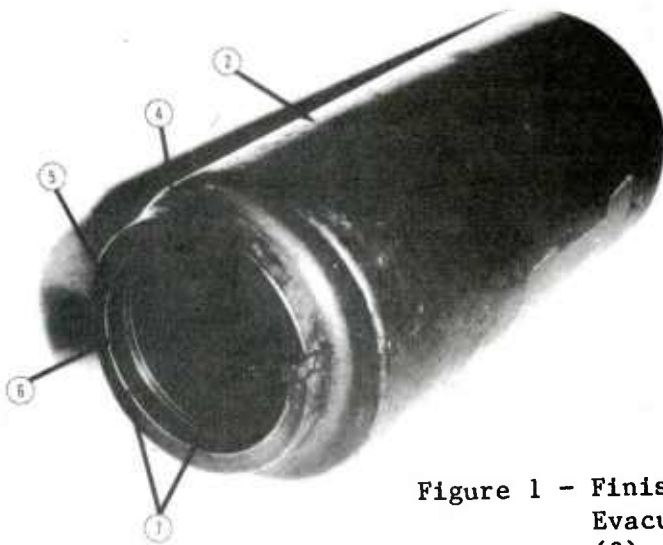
Finish Machined Chamber Evacuator. Machined Surfaces (2), Face (4), Bore (5), Groove (6) Chamfers (7)
